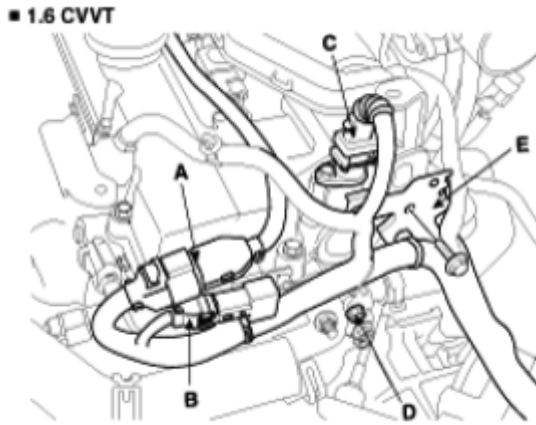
Identifying Ignition Coil Connector, Ignition Coil Condenser Connector, CMP Connector, Ground Cable And Wire Harness Bracket
